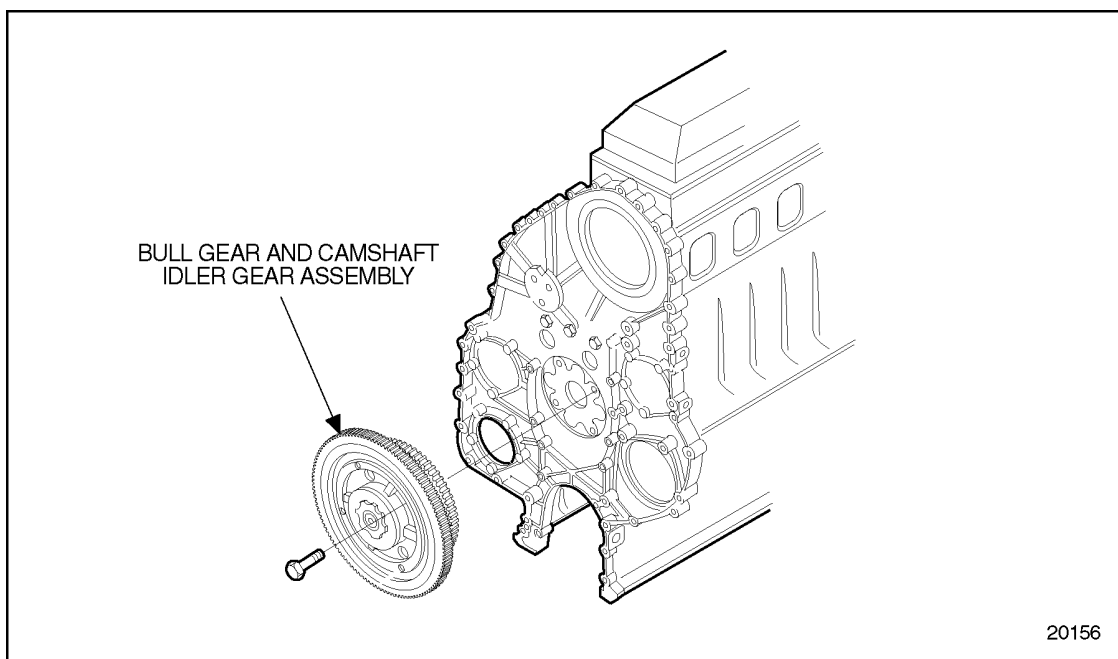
Bull Gear and Camshaft Idler Gear Assembly
